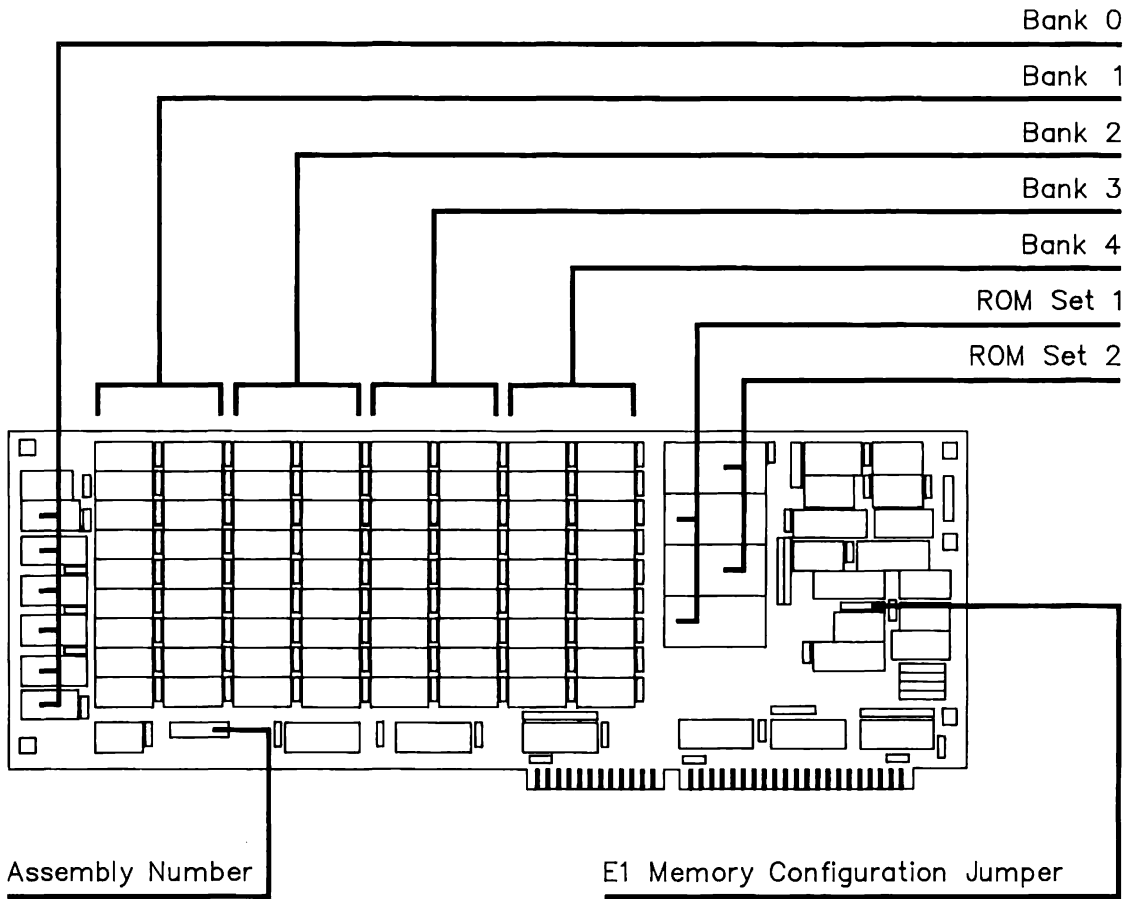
COMPAQ DESKPRO 286 System Memory Board Version 2 and Version 3 Component Layout
